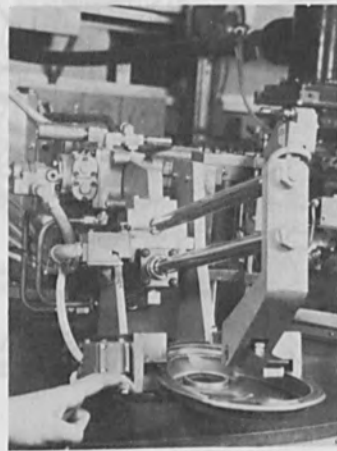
Close-Up View of Weldment Unloading Mechanism and Station.
